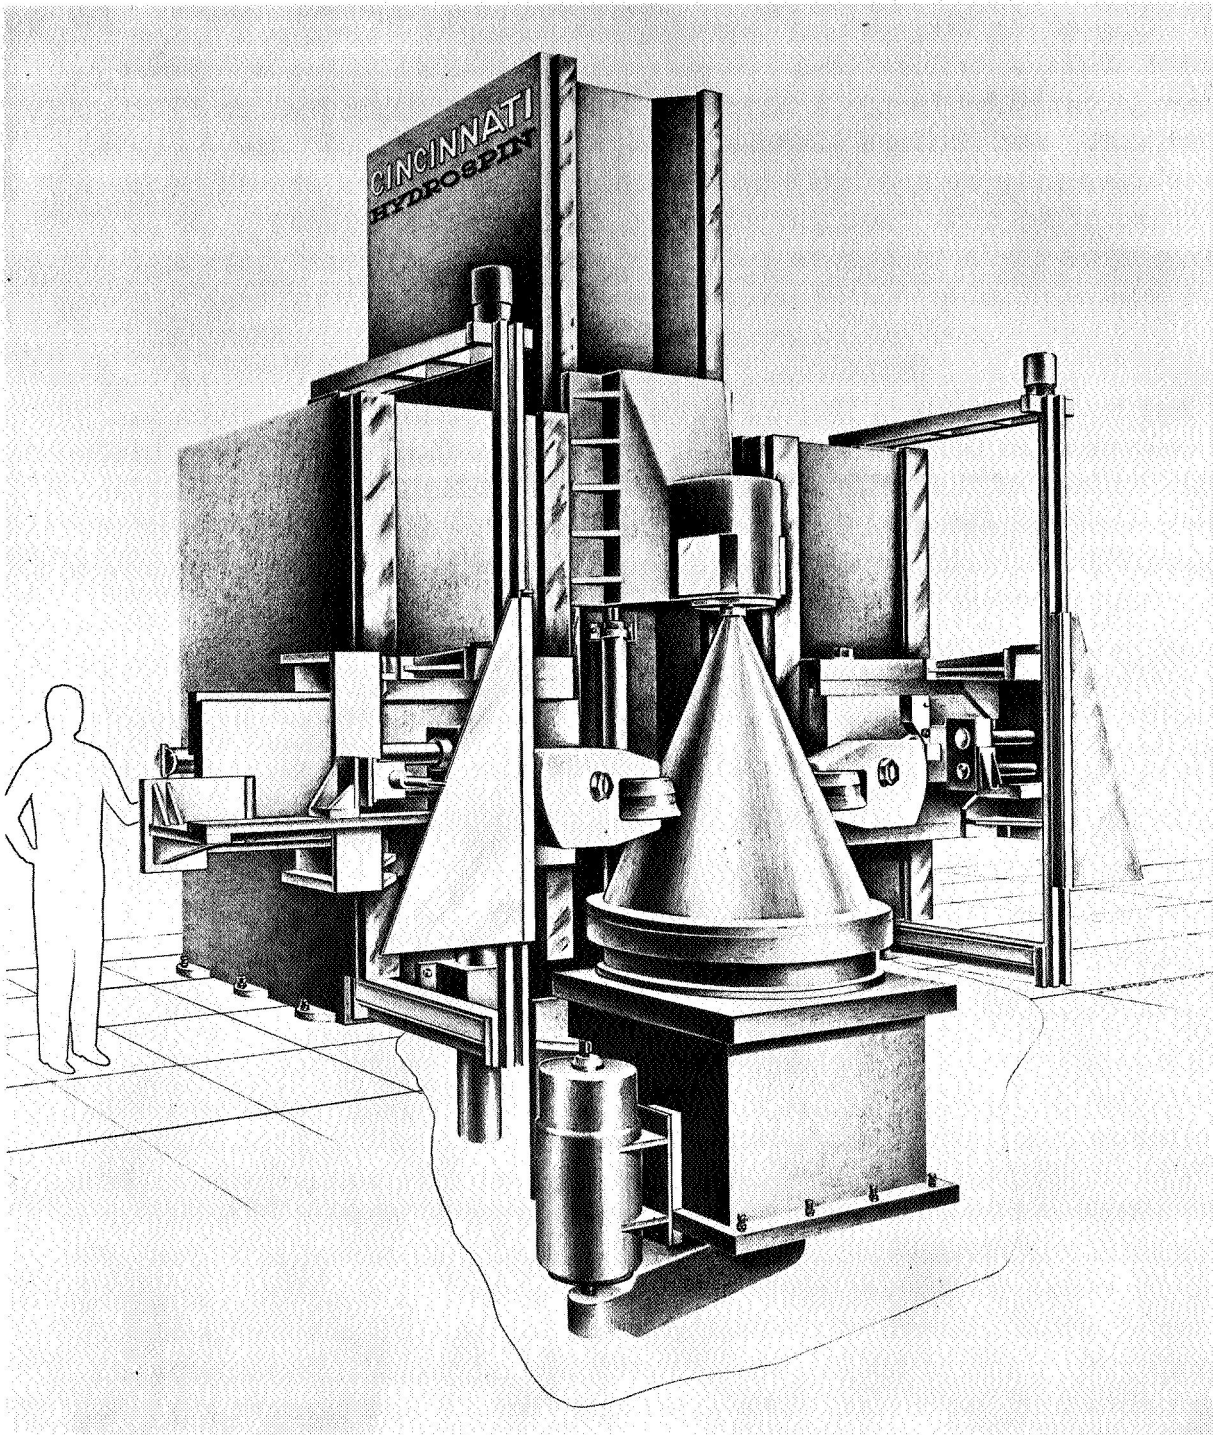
70 x 72-INCH VERTICAL SHEAR-FORMING MACHINE
